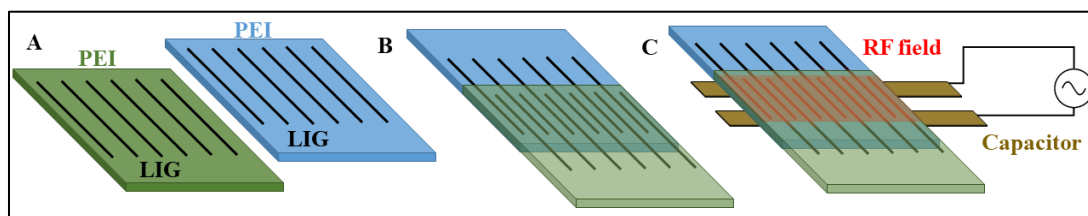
(A) To create lap-shear test samples, we use two polymer coupons, each is patterned with LIG stripes using the laser. (B) The coupons are placed in contact with each other prior to being placed atop a capacitor with a fringing RF field. (C) The fringing field will induce heating in LIG and polymer bonding. This allows for rapid, non-contact, non-oven welding.
